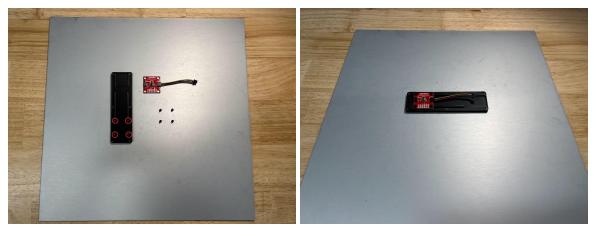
Locations and fasteners necessary to attach the pressure sensor board to *Electronics Enclosure Bottom
